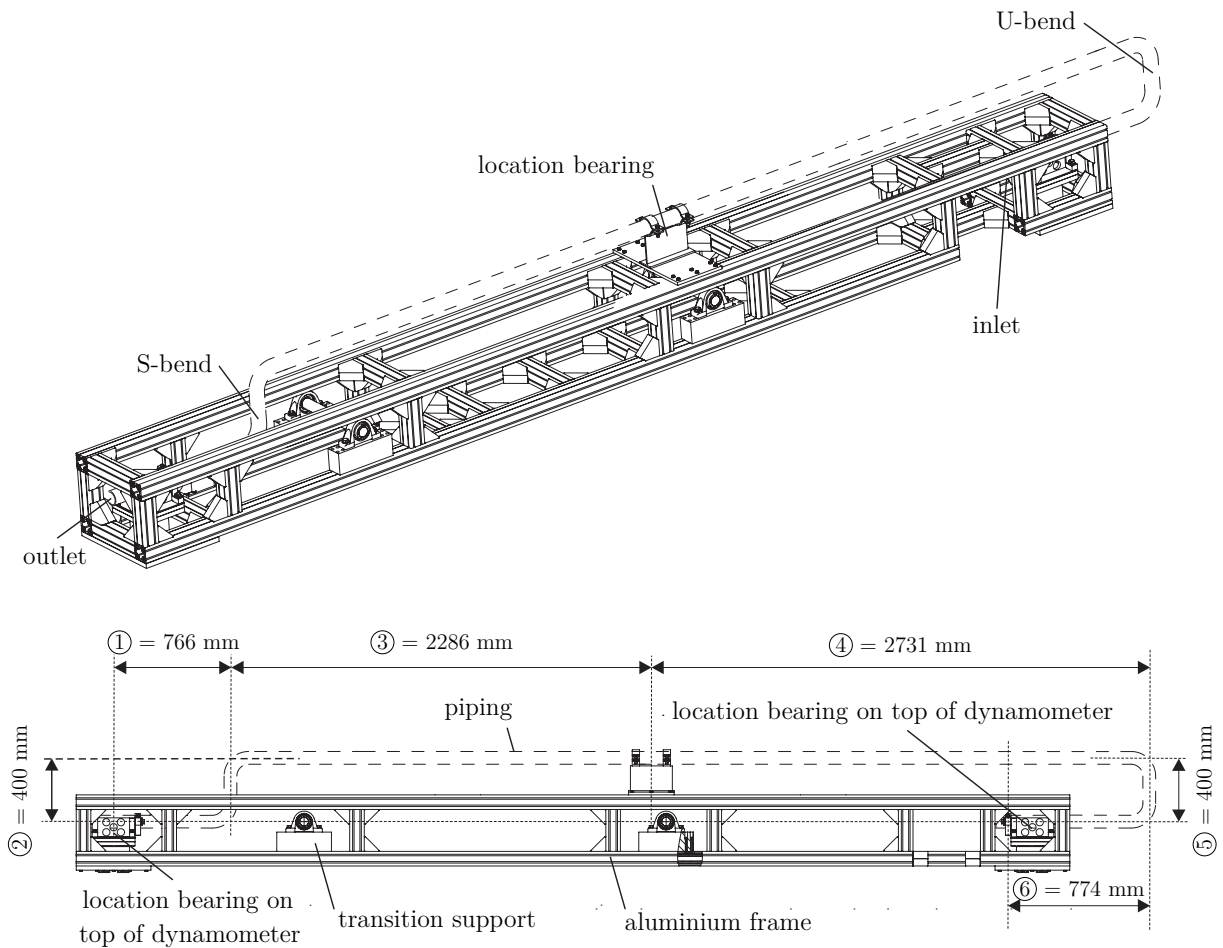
Technical drawing of the traverse; isometric view (top) and side view (bottom)
